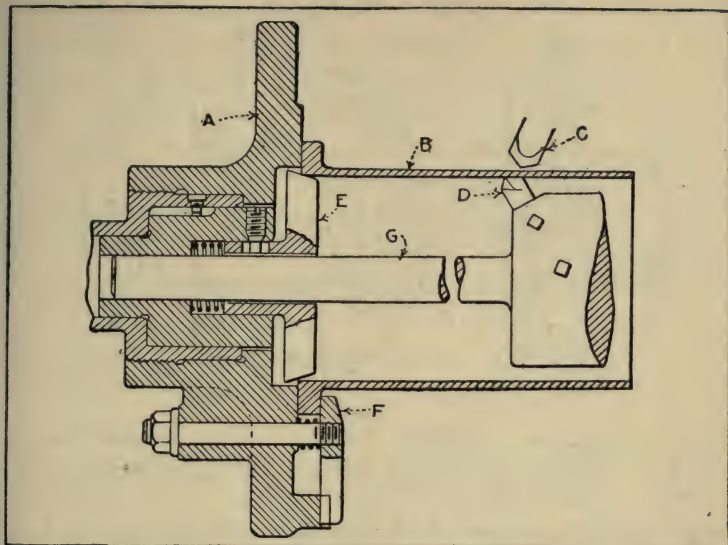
SECTION THROUGH A SELF-CENTERING FIXTURE FOR A RING POT
